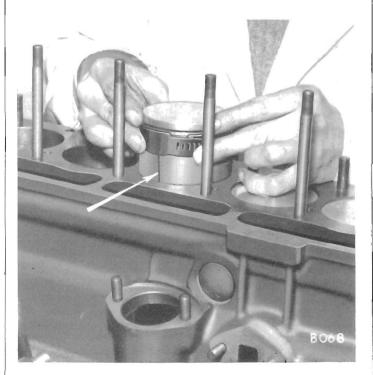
Fitting pistons and connecting rods Note split skirt to camshaft side of engine
